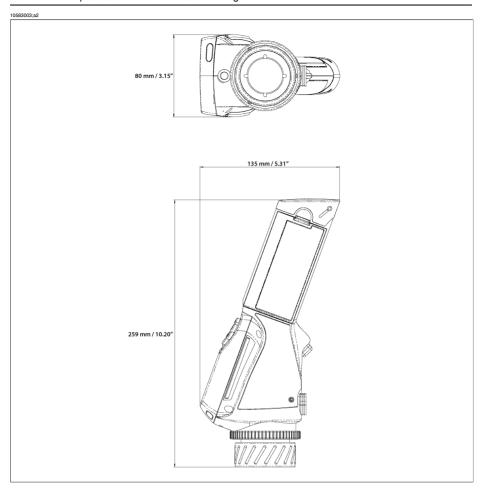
Overall dimensions of the camera with a 27.4 mm IR lens.
